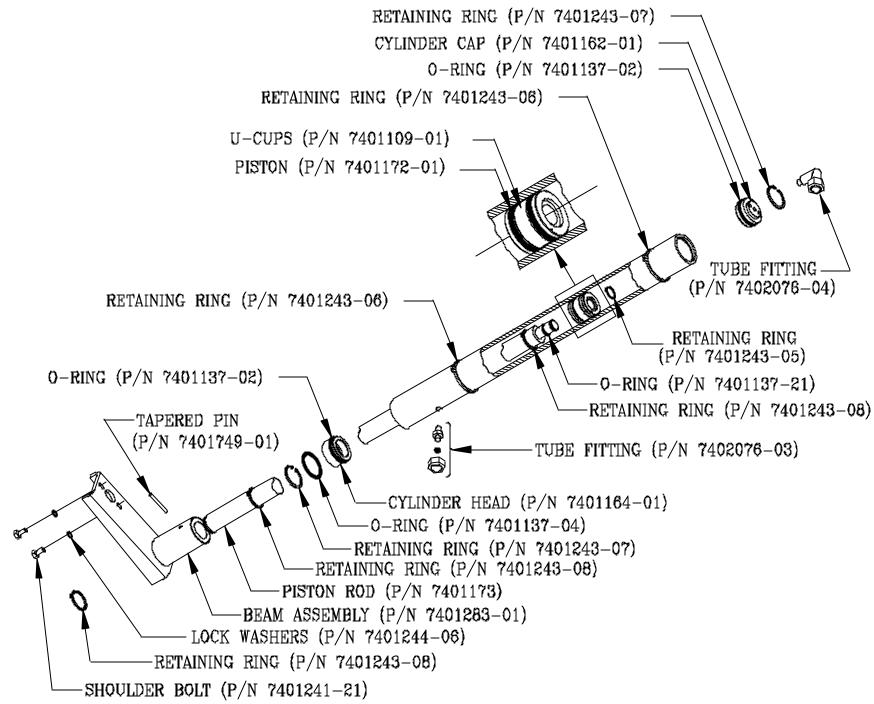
CONTHERM Hydraulic Lift Assembly With Hold Down
